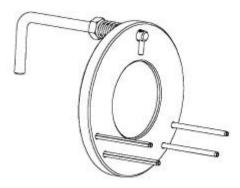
Secondary Camshaft Chain Holder 8429 Courtesy of CHRYSLER LLC
